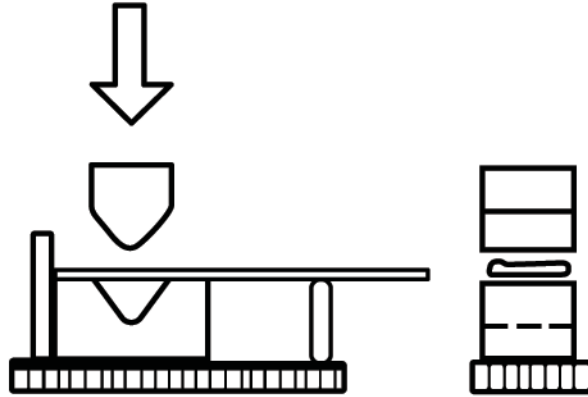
Schematic Fixture for the Guided-bend, V-bend Test
